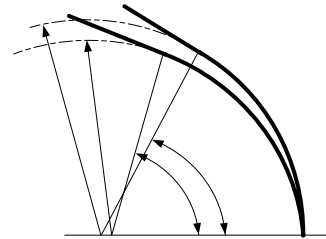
Relation of the bending angle and radius by spring-back after bending
